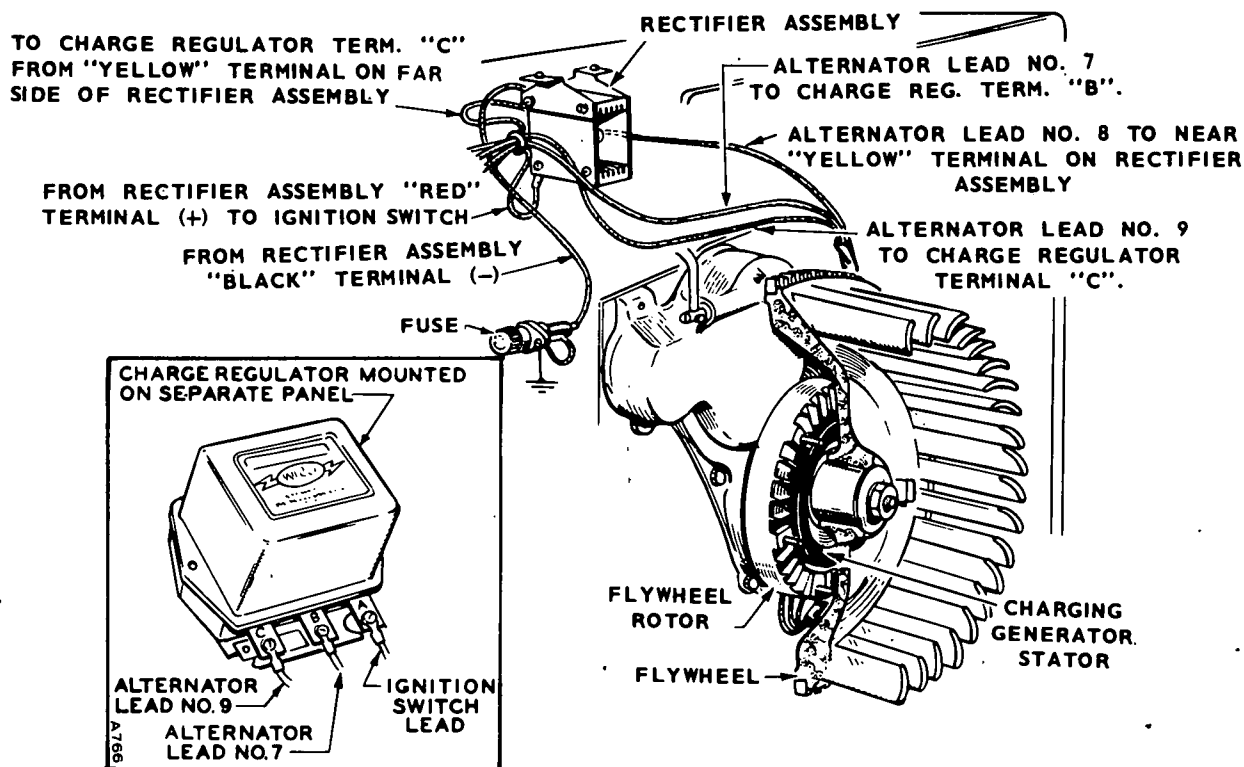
FLYWHEEL ALTERNATOR (PRIOR TO SPEC T)
